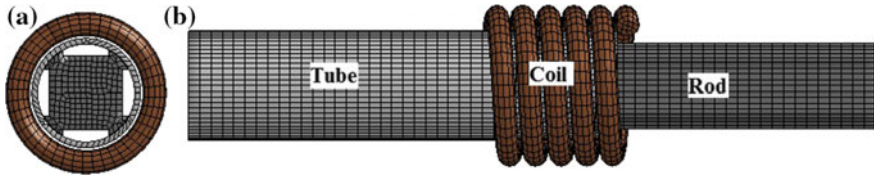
Arrangement of rod, coil, and tube a side and b front view
